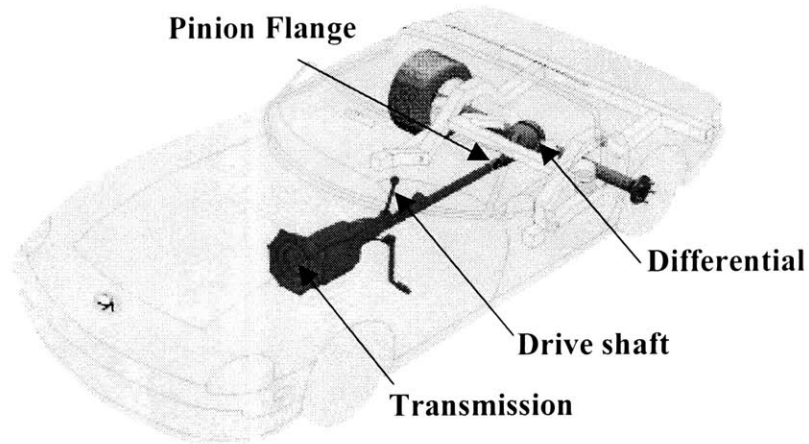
Automotive drive axle in a rear wheel drive car (courtesy of <http://www.autoshop-online.com/auto101/drive.html>)
